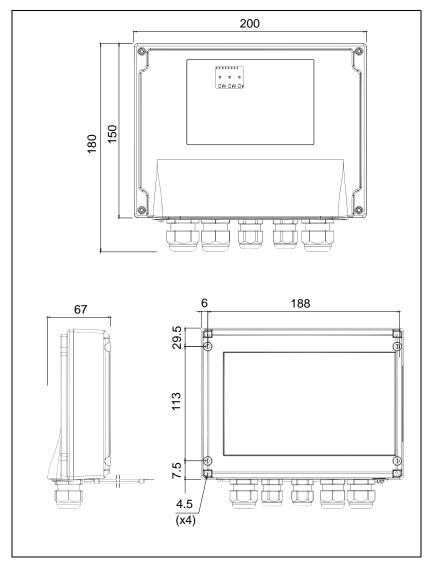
Dimensions, EMX-B25/35 control unit (mm).
